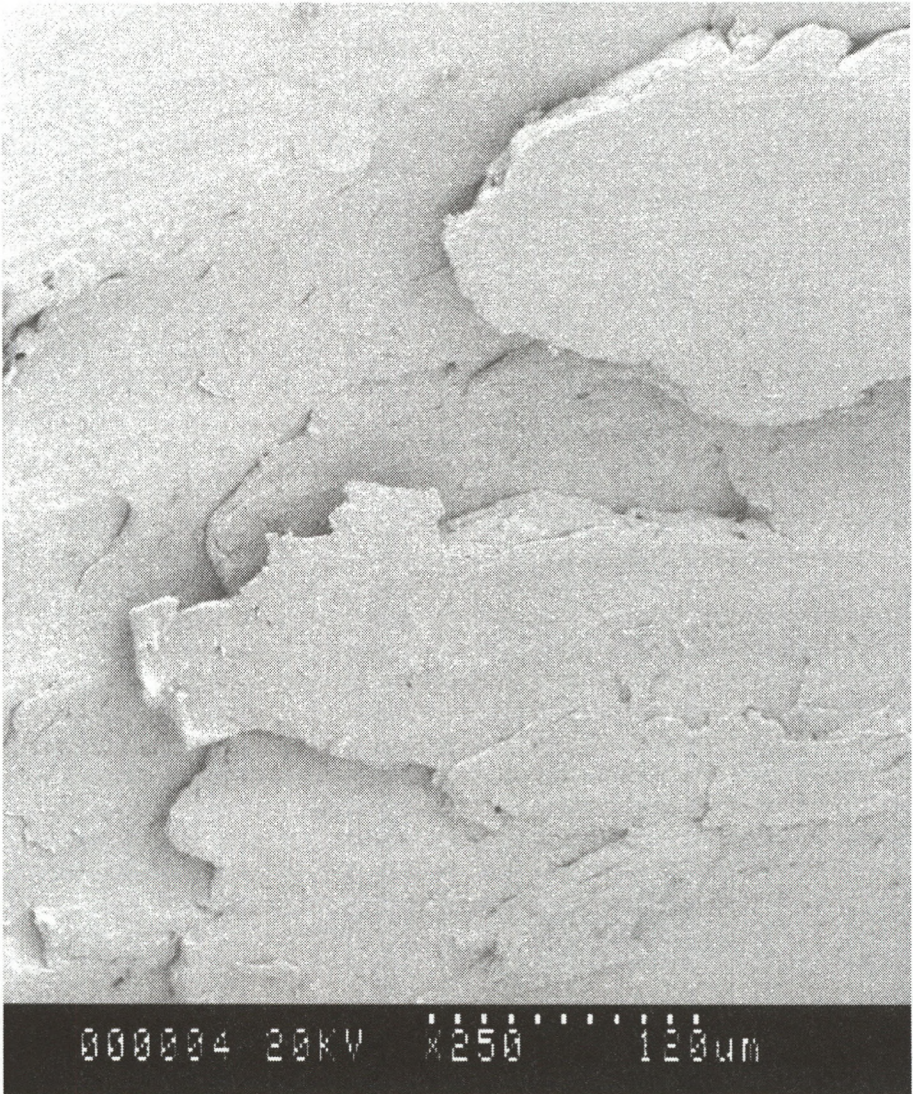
95%Pt-5%Ru surface of last hole drilled prior to failure
